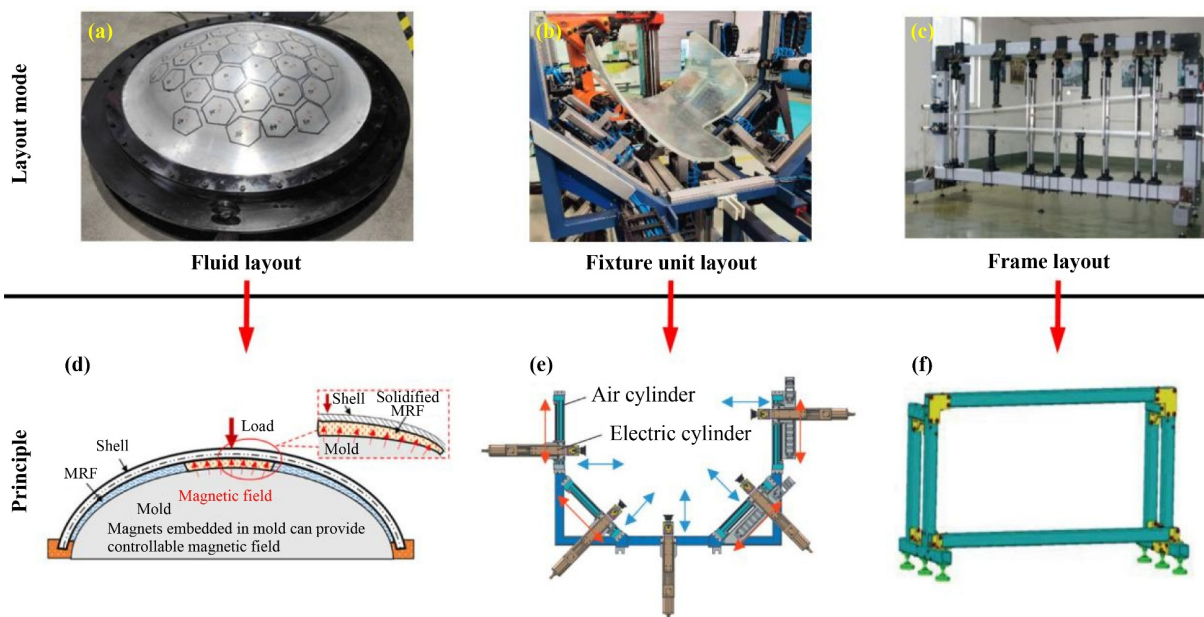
Fixture layout mode: (a) fluid layout [174], (b) fixture unit layout [32], and (c) frame layout [39]. Principle of fixture layout: (d) fluid layout, (e) fixture unit layout, and (f) frame layout. MRF: magnetorheological fluid. Reproduced with permissions from Refs. [32,39,174] from Elsevier.
